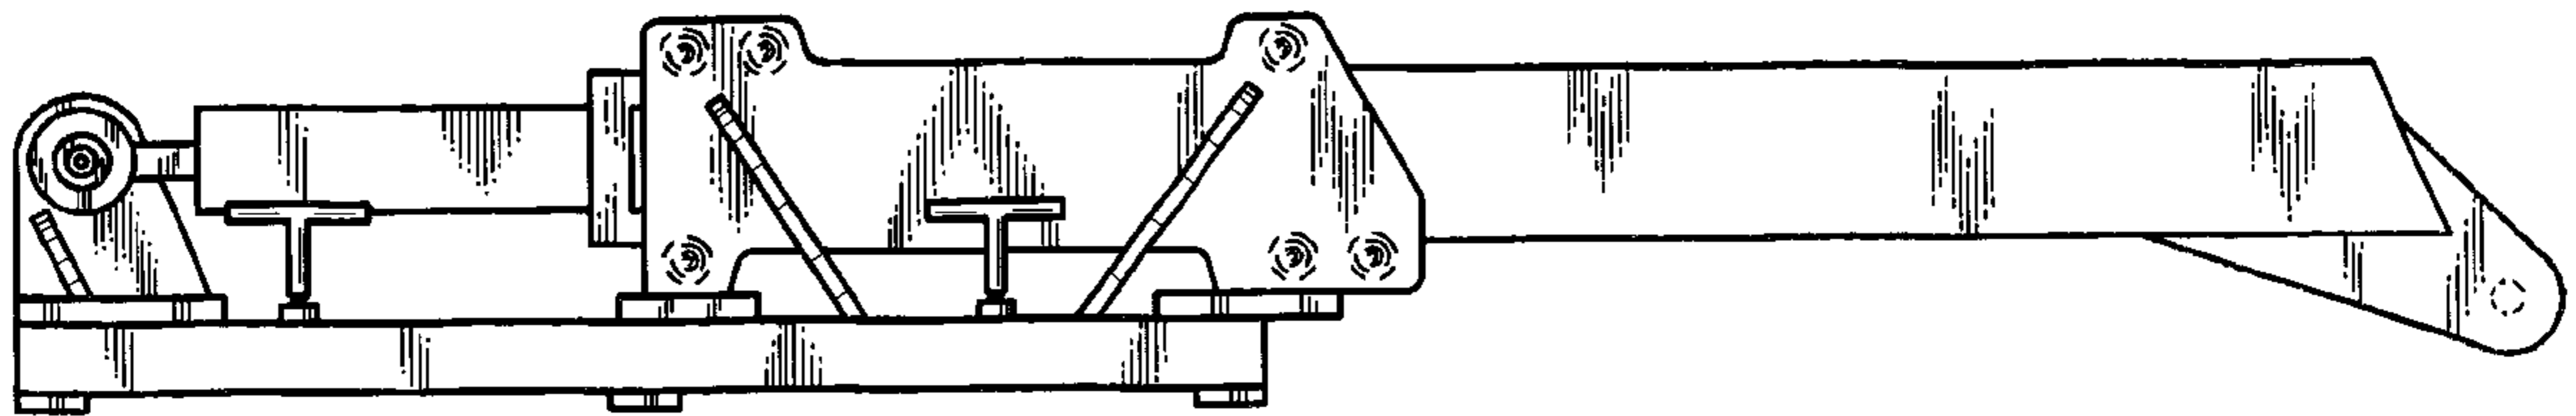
is a bottom view of the hydraulic-powered telescopic forklift attachment;
